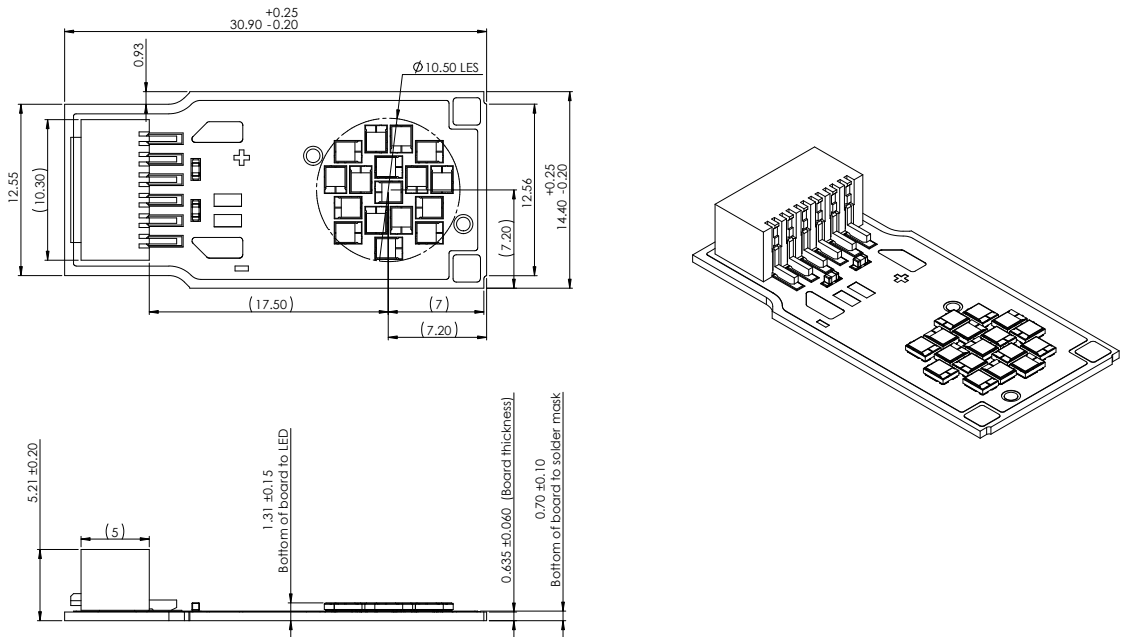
Package outline drawing for LUXEON S2000 / LXSx-Pxxx-0017.
